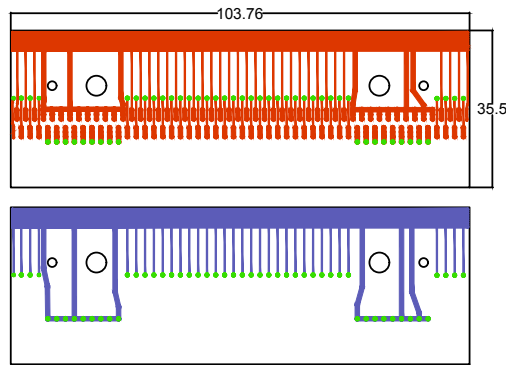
Gating grid plane circuit board. Dimensions in mm.
